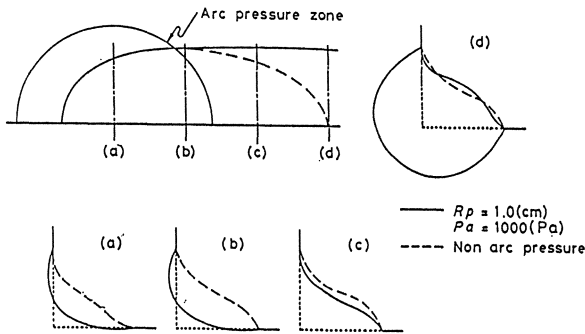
Effect of arc pressure on weld geometry in horizontal fillet welding
